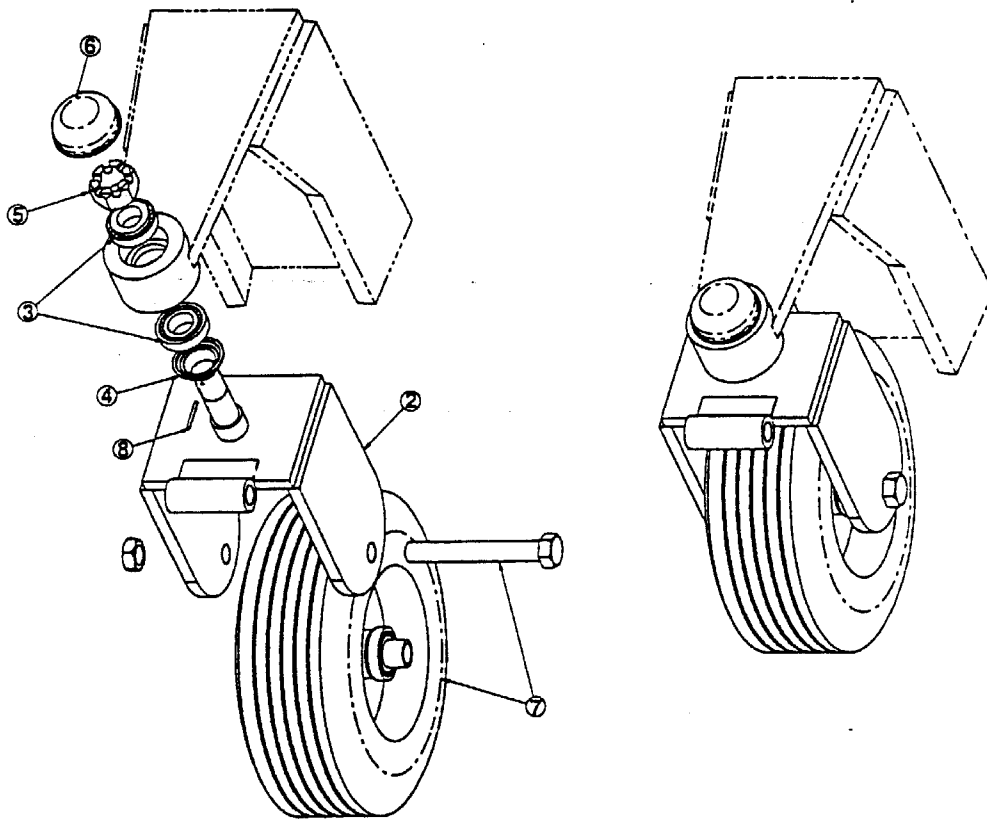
Front Wheel Support Assembly (Index No. 13)
